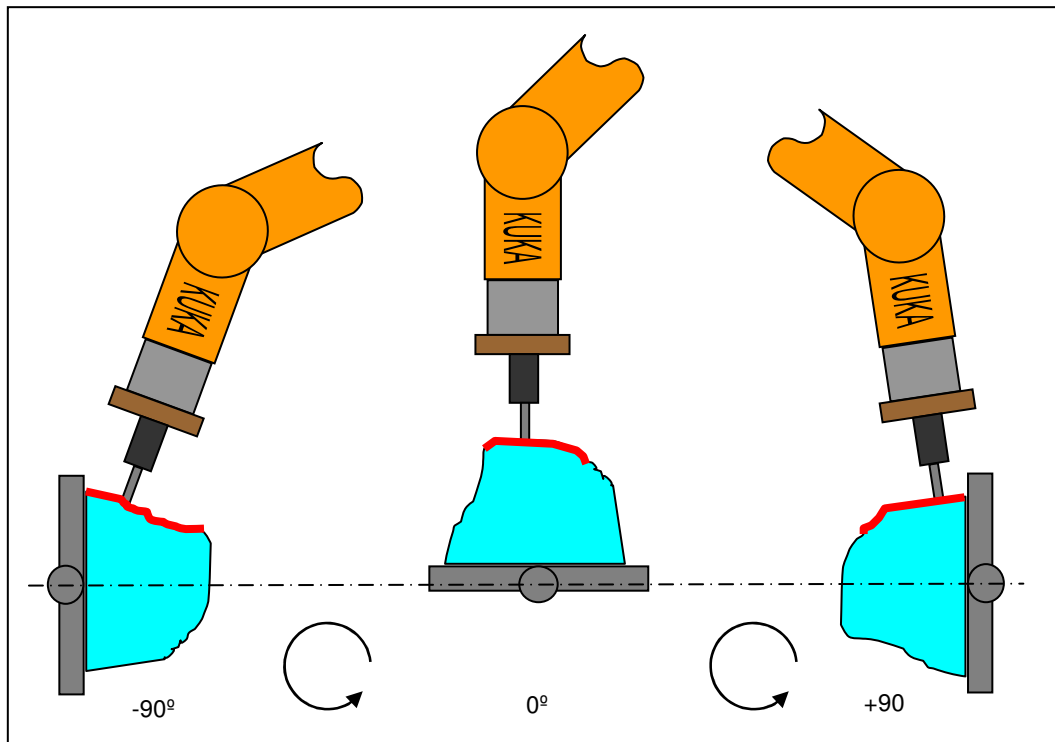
Incremental auxiliary rotational work piece fixture axis
